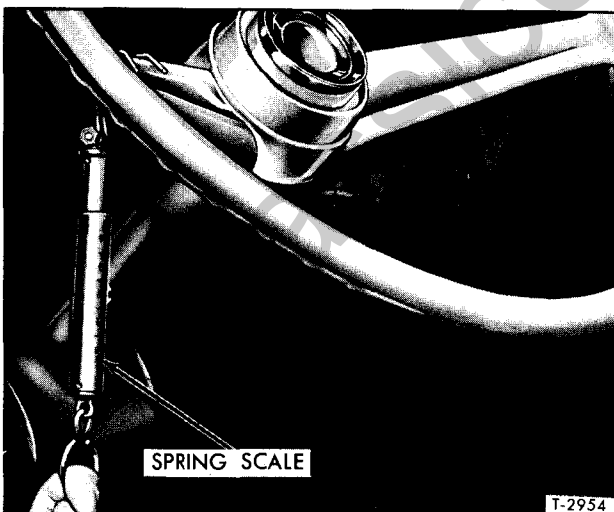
Checking Steering Wheel Rim Pull (Typical)
